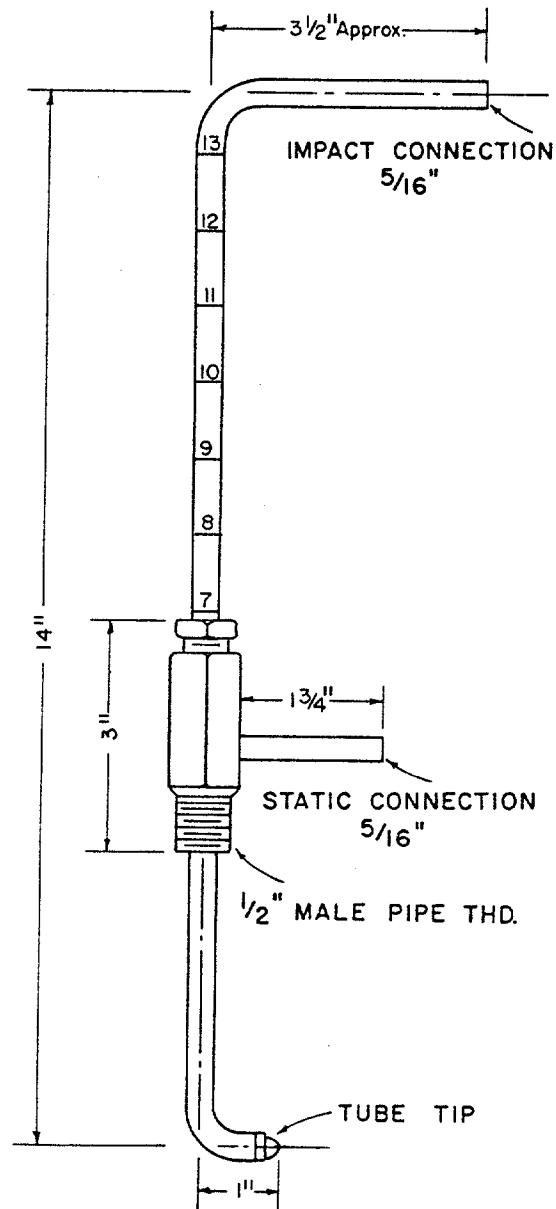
Drawing of a commercially available Pitot tube (Ref. 3.3). (Courtesy Chandler Engineering Company.)
